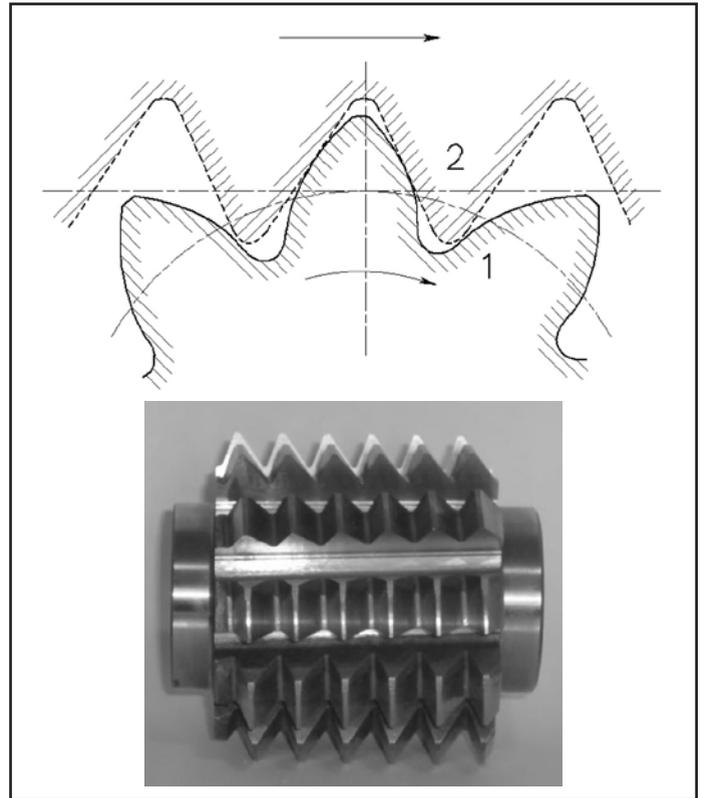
a. rack generating: 1) gear profile; 2) hob or rack cutter profile; b. asymmetric gear hob cutter.
